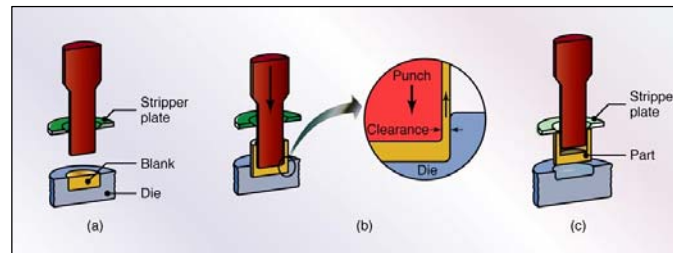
Schematic illustration of the impact-extrusion process. The extruded parts are stripped by use of a stripper plate, because they tend to stick to the punch.
